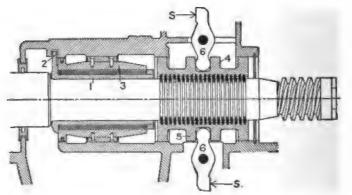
Bearing at Governor End of Westinghouse-Parsons Turbine—at Right-hand End of Fig. 629.
